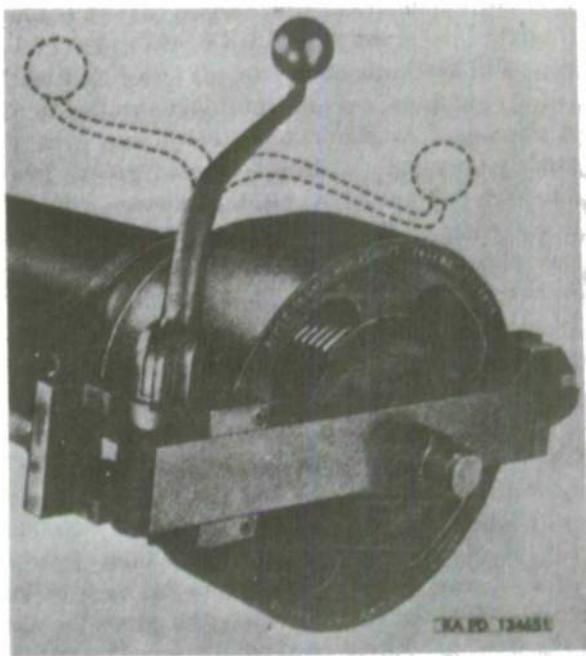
Typical Recoilless Rifle Breech, Breechblock Locking Threads Partly Engaged
